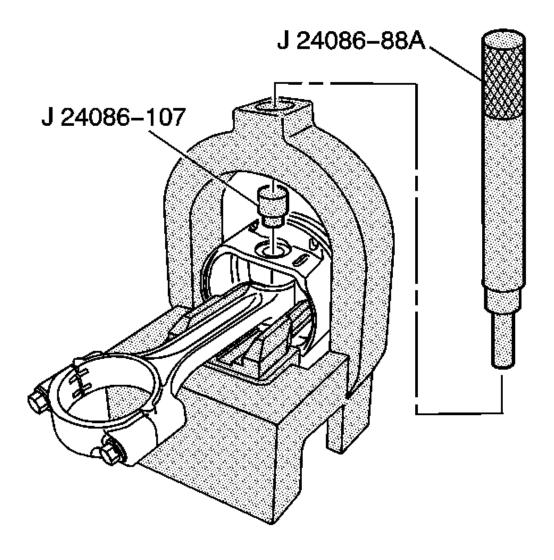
View Of J 24086-107 & J 24086-88A Courtesy of GENERAL MOTORS CORP.
